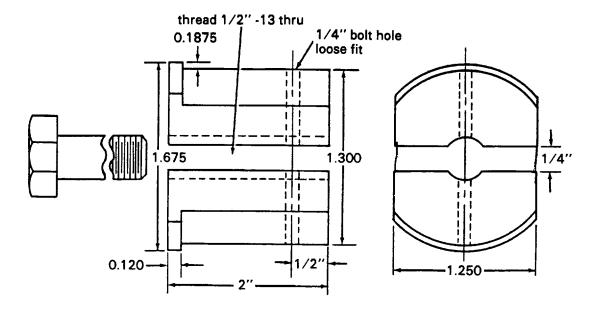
Hydraulic Piston Pump - Shaft Seal Driver
